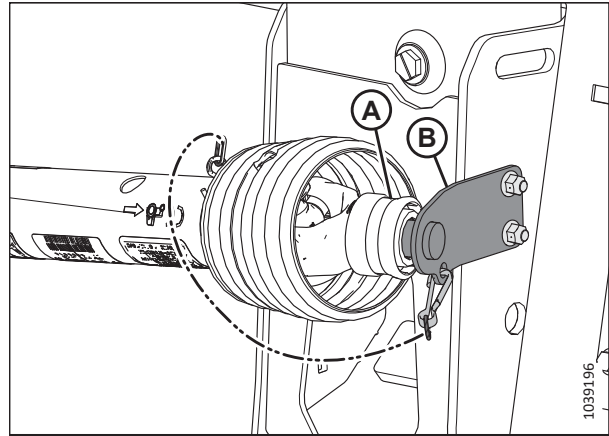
Driveline in Storage Position – Driveline B7038 or B7039
